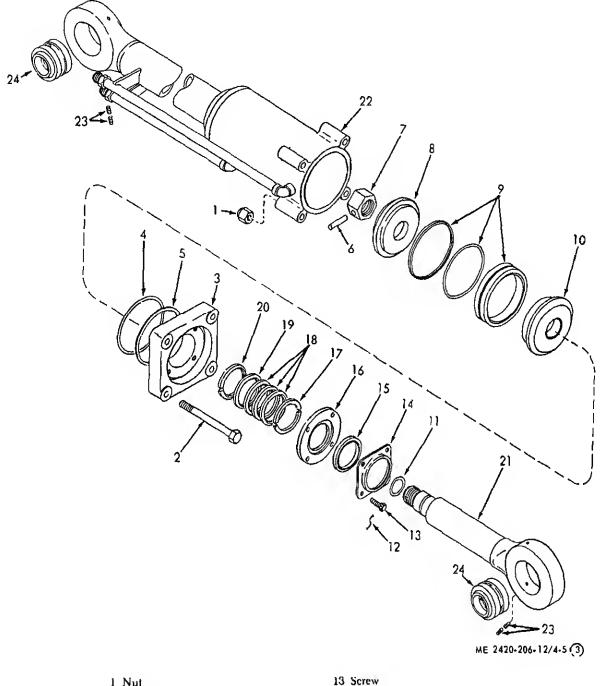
Bulldozer lift and tilt cylinder, removal, disassembly, reassembly, and installation (sheet 1 of 3).
